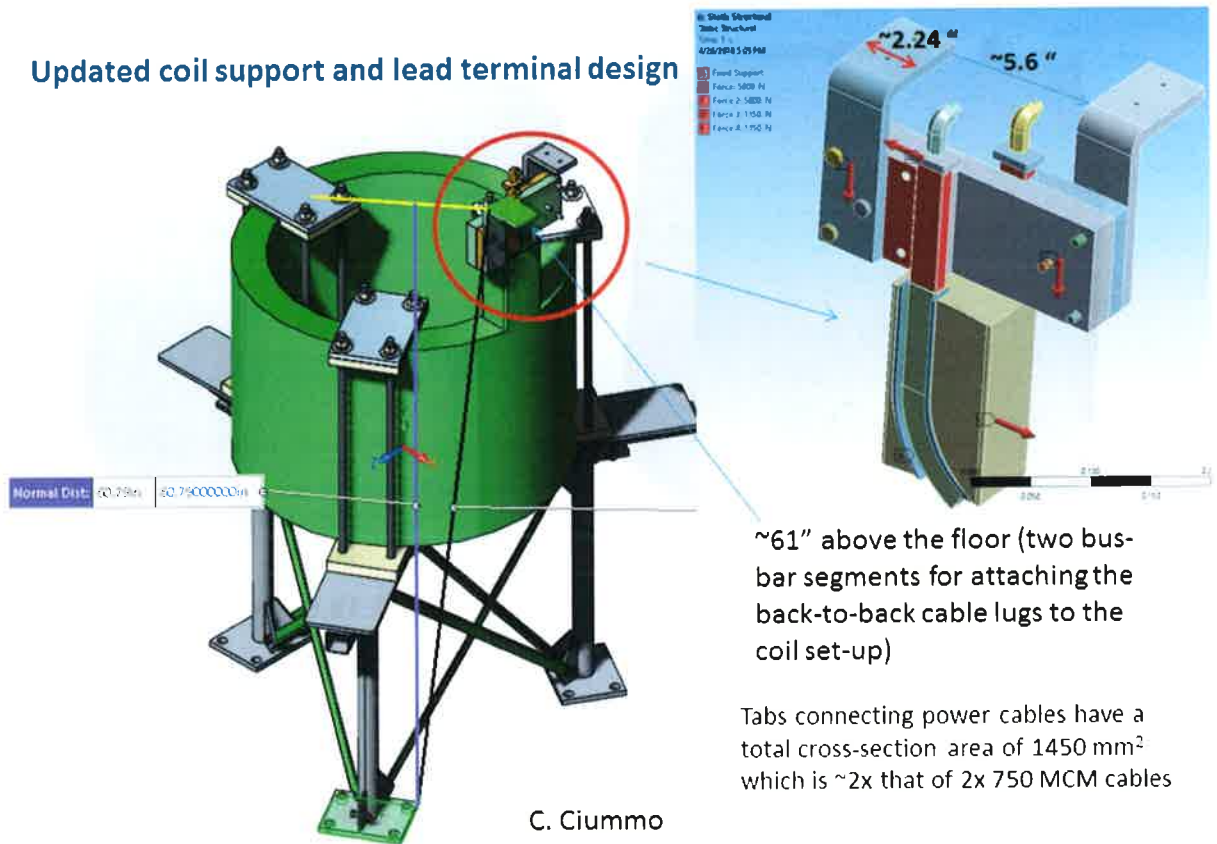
Test stand, prototype coil mounting and terminal connection to cables
